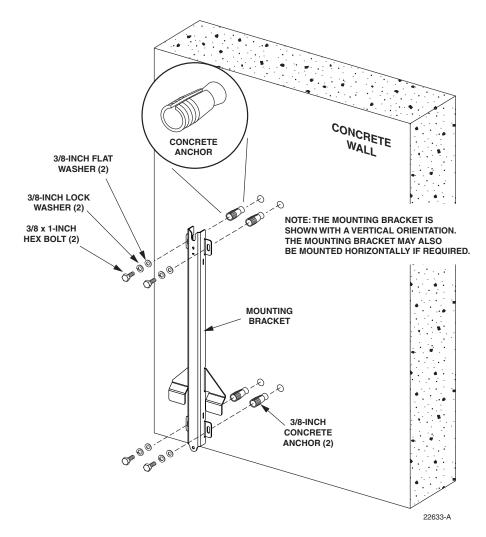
Secure Standard Mounting Bracket to a Masonry Wall
